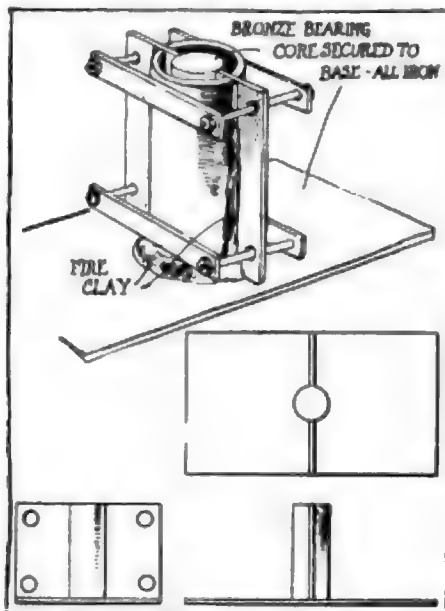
EQUIPMENT FOR RE-BABBITTING
